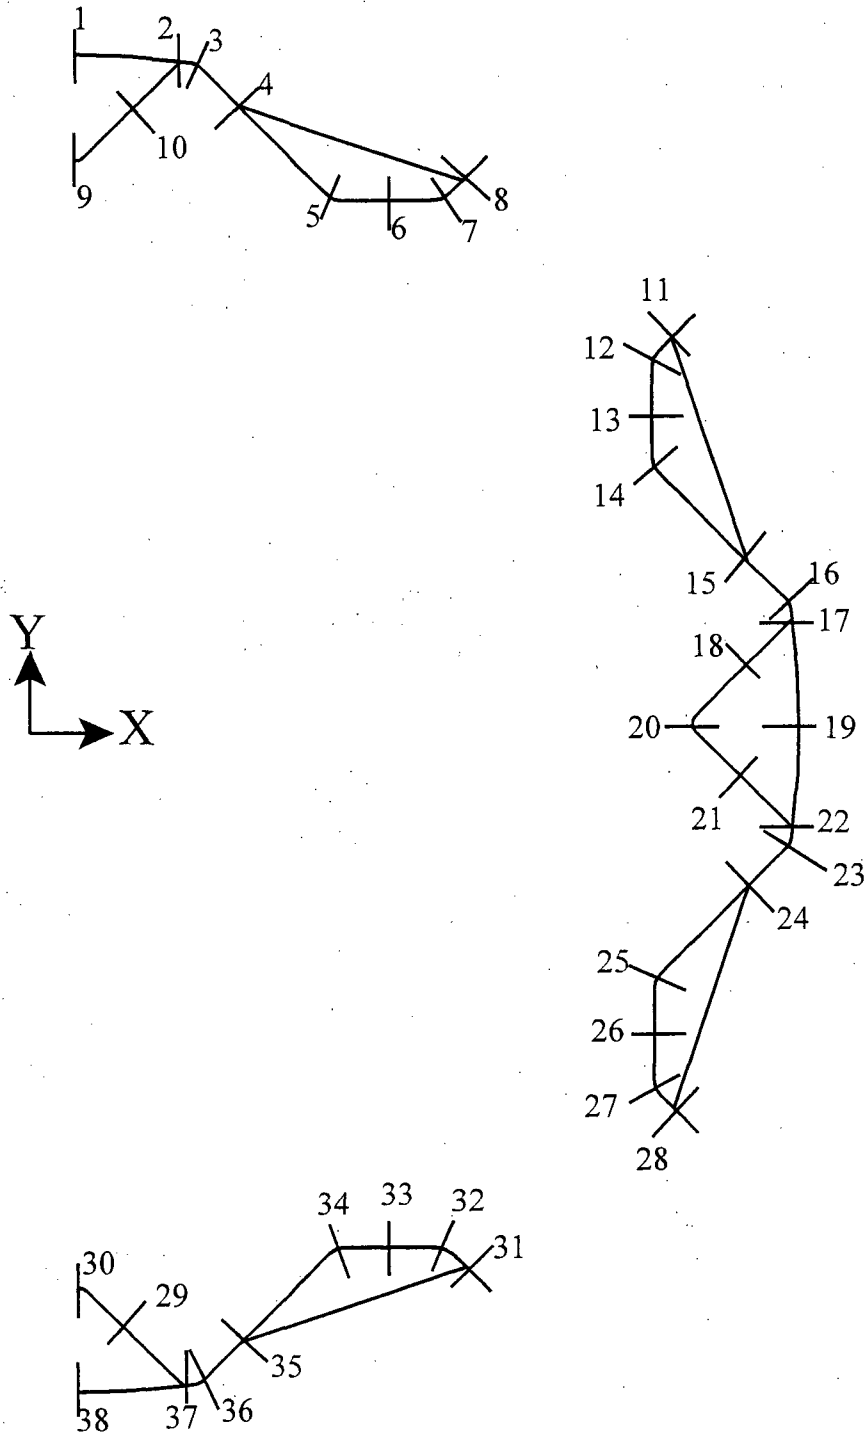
BWR Side Support Weldment Section Cuts – 0° Basket Orientation
